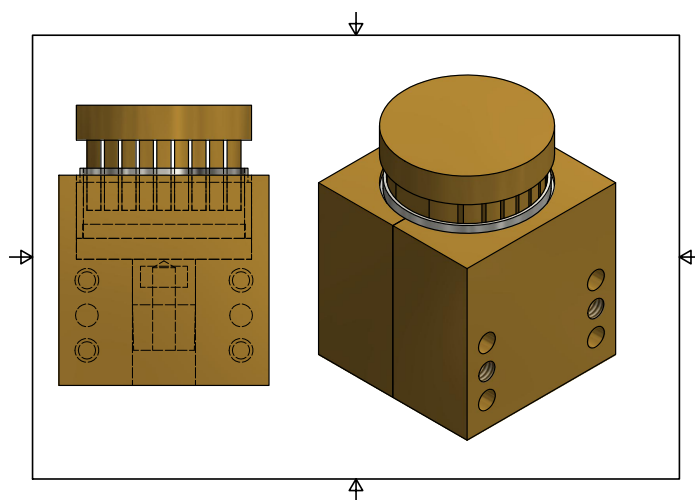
Sinter jig and press for the 25 mm heat exchanger, showing the cross-section and the fastenings for disassembly.
